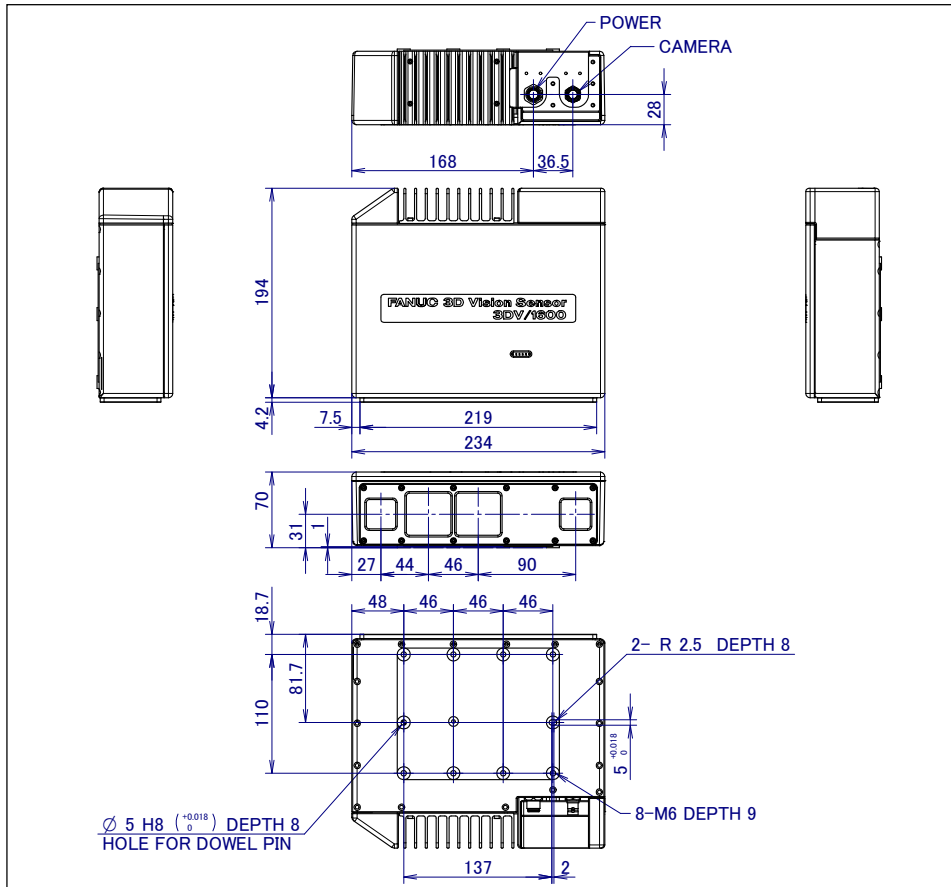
(c) External dimensions of 3D Vision Sensor (3DV/1600)
